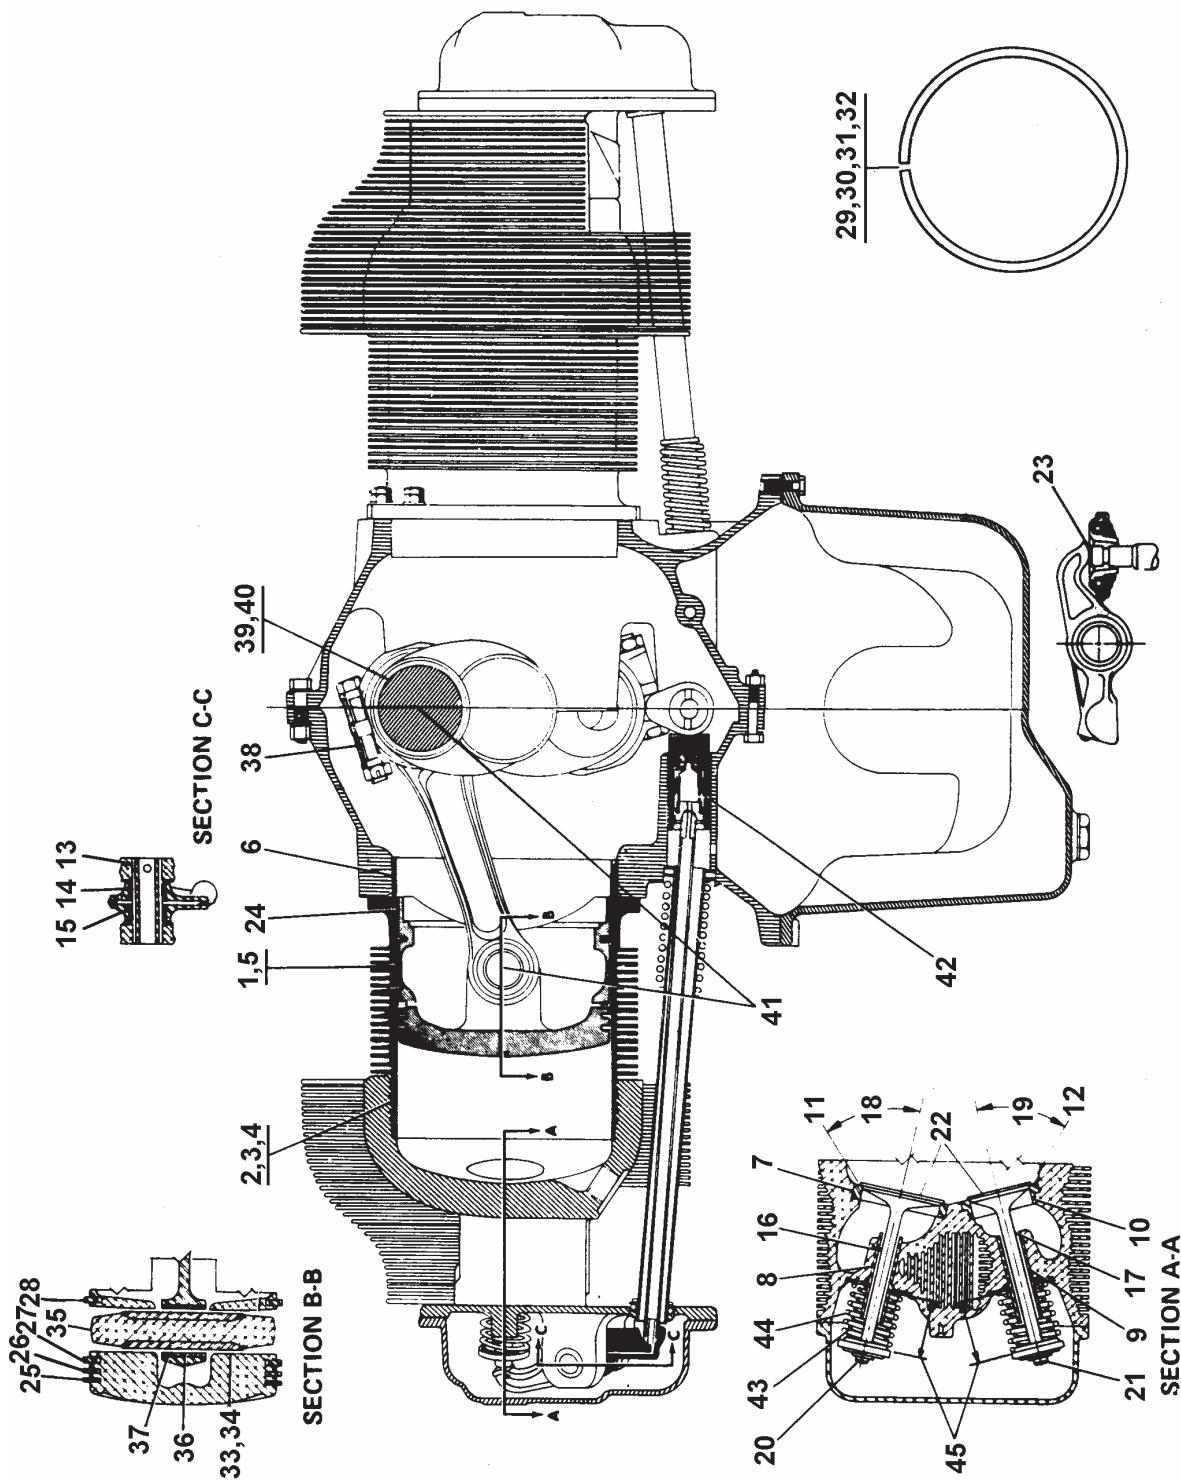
IO-550-A, B & C Updraft Cylinder Dimensions
